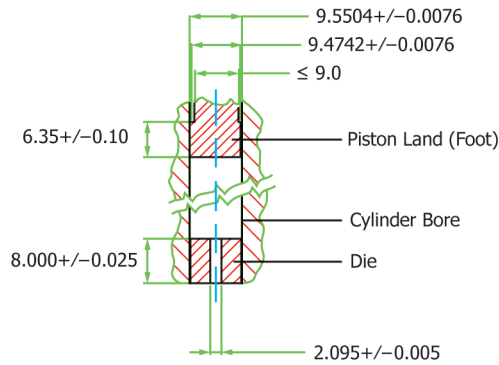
Dimensions of the cylinder bore, piston foot & standard die
